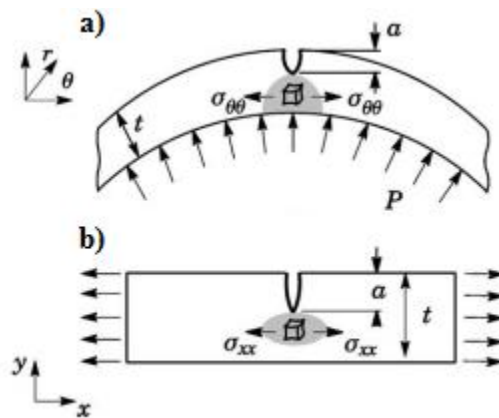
(a) Schematic loading condition for a pressured pipe; (b) SENT test specimen [41].
